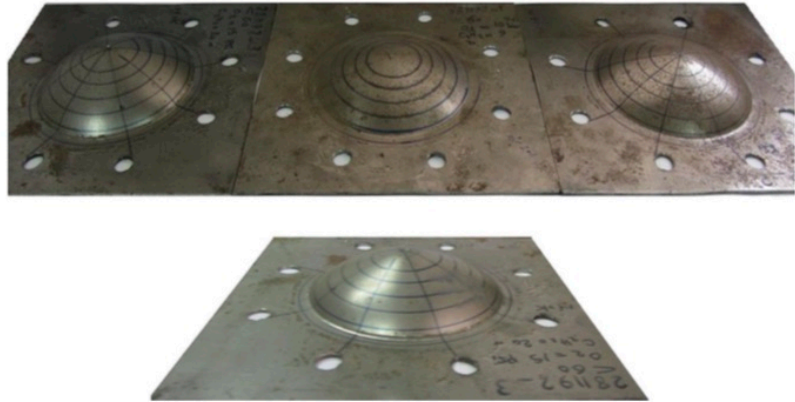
Photograph of deformed steel plates by using gas mixture detonation
